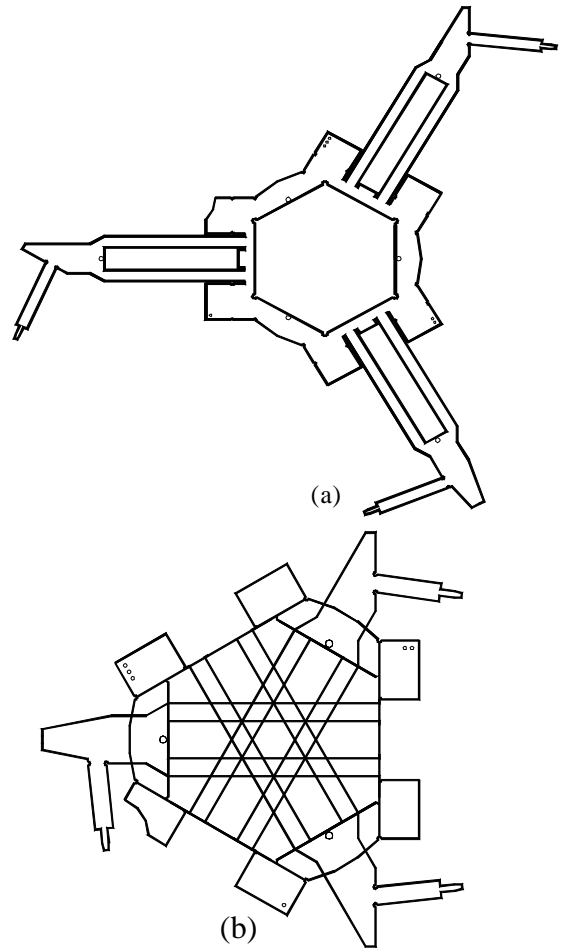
Layout of the unfolded strip conductor (a) and a folded crossover assembly (b).
